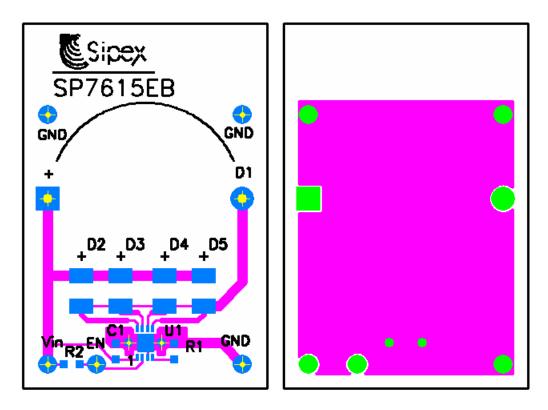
SP7615 Evaluation Board Layout top and bottom side
